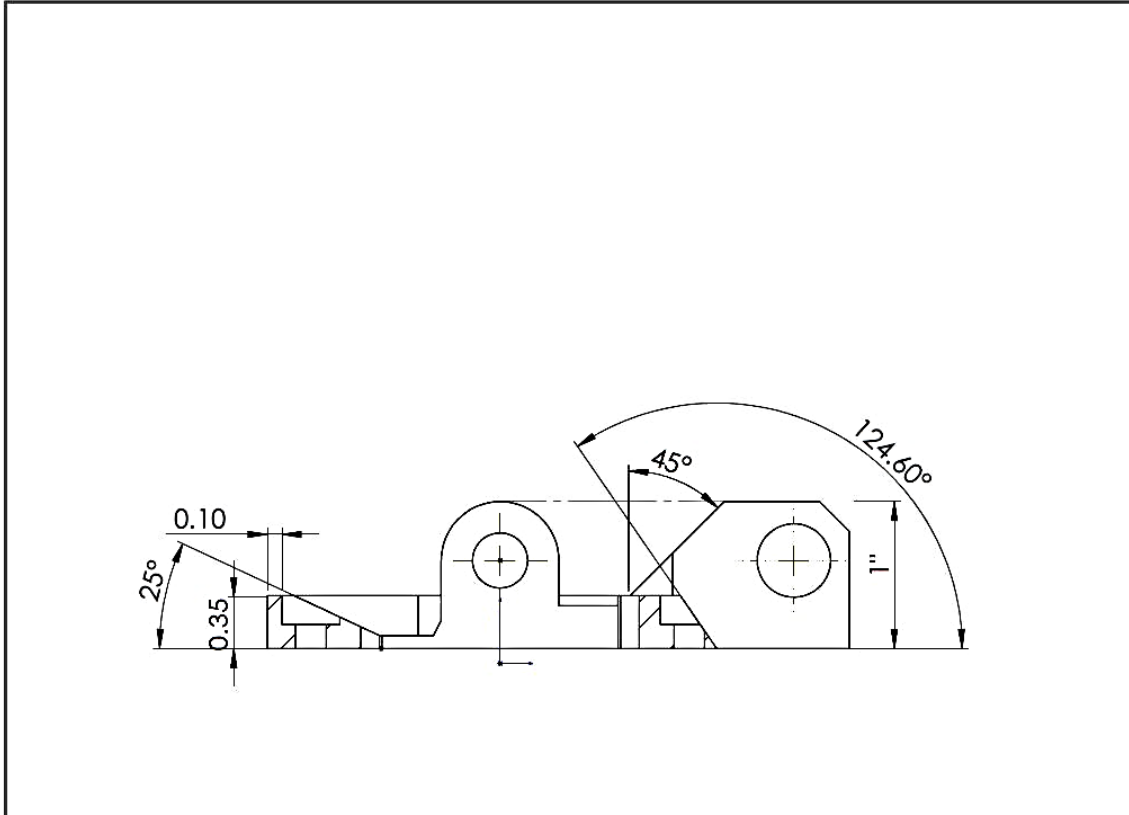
Technical drawing for machining the bottom ankle plate. (2 of 3)
